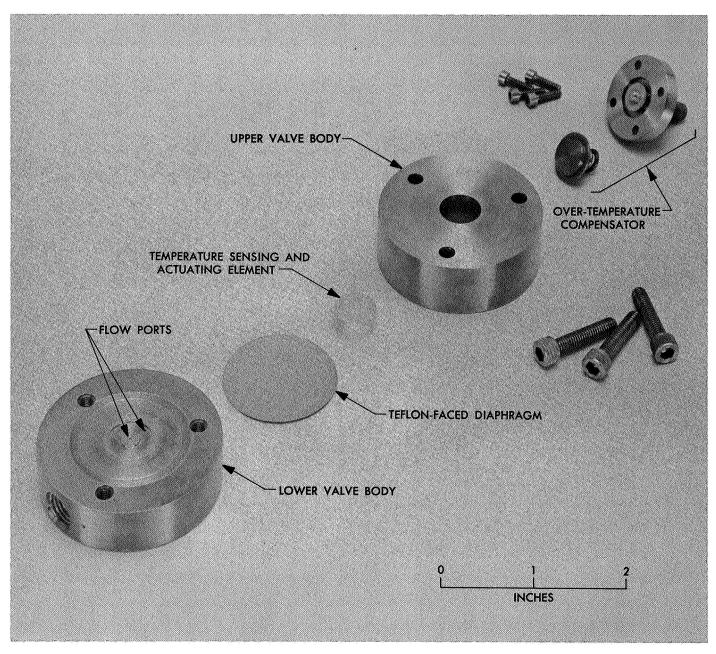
Prototype temperature sensing and metering valve, disassembled
